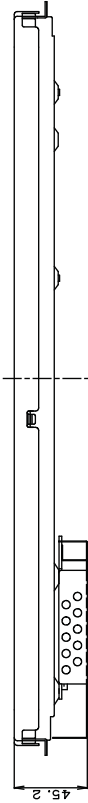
LQ197V3DZ81 OUTLINE DIMENSIONS
